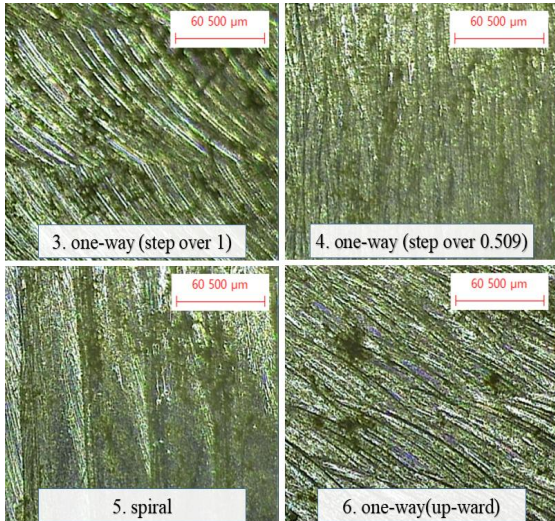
Microscopic views of the surfaces in corner radius endmill
